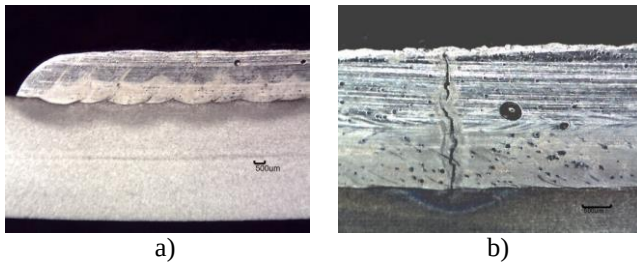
Structure of the two-layer overlay weld: a) overlay weld in the cross-section perpendicular in relation to the direction of surfacing, b) crack revealed in the overlay weld, substrate – steel S355, overlay weld: 90% Stellite 6 - 10%WC
